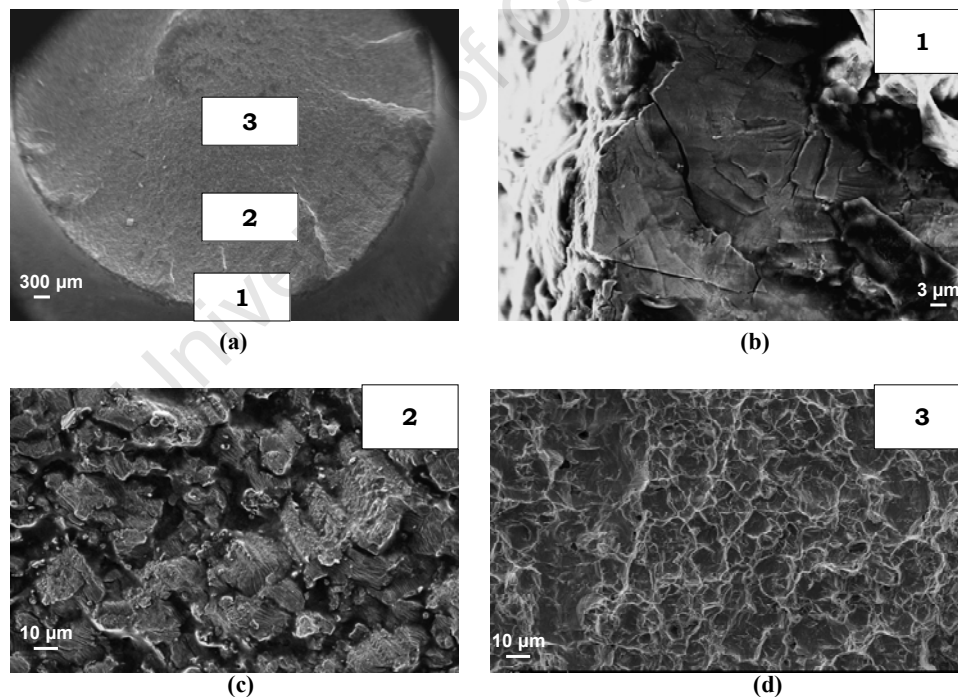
Fatigue fracture morphology of Ti-6Al-4V specimen that underwent Ox850/850Va. (a) overall fracture surface; (b) crack initiation zone; (c) crack propagation zone and (d) fast fracture zone
